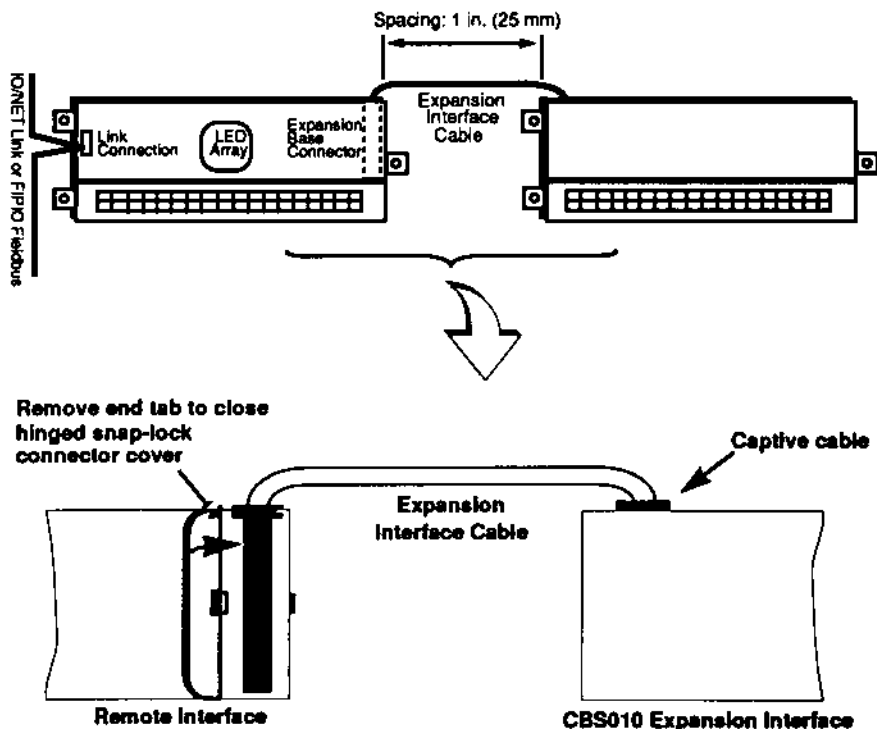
Installing the CBS010 Expansion Interface Cable with Type CRM270/275 or TBXLEPxxx Interfaces
